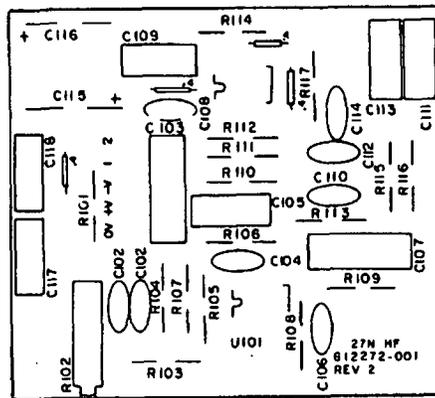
Typical Circuit Board Layout - Harmonic Filter Module
